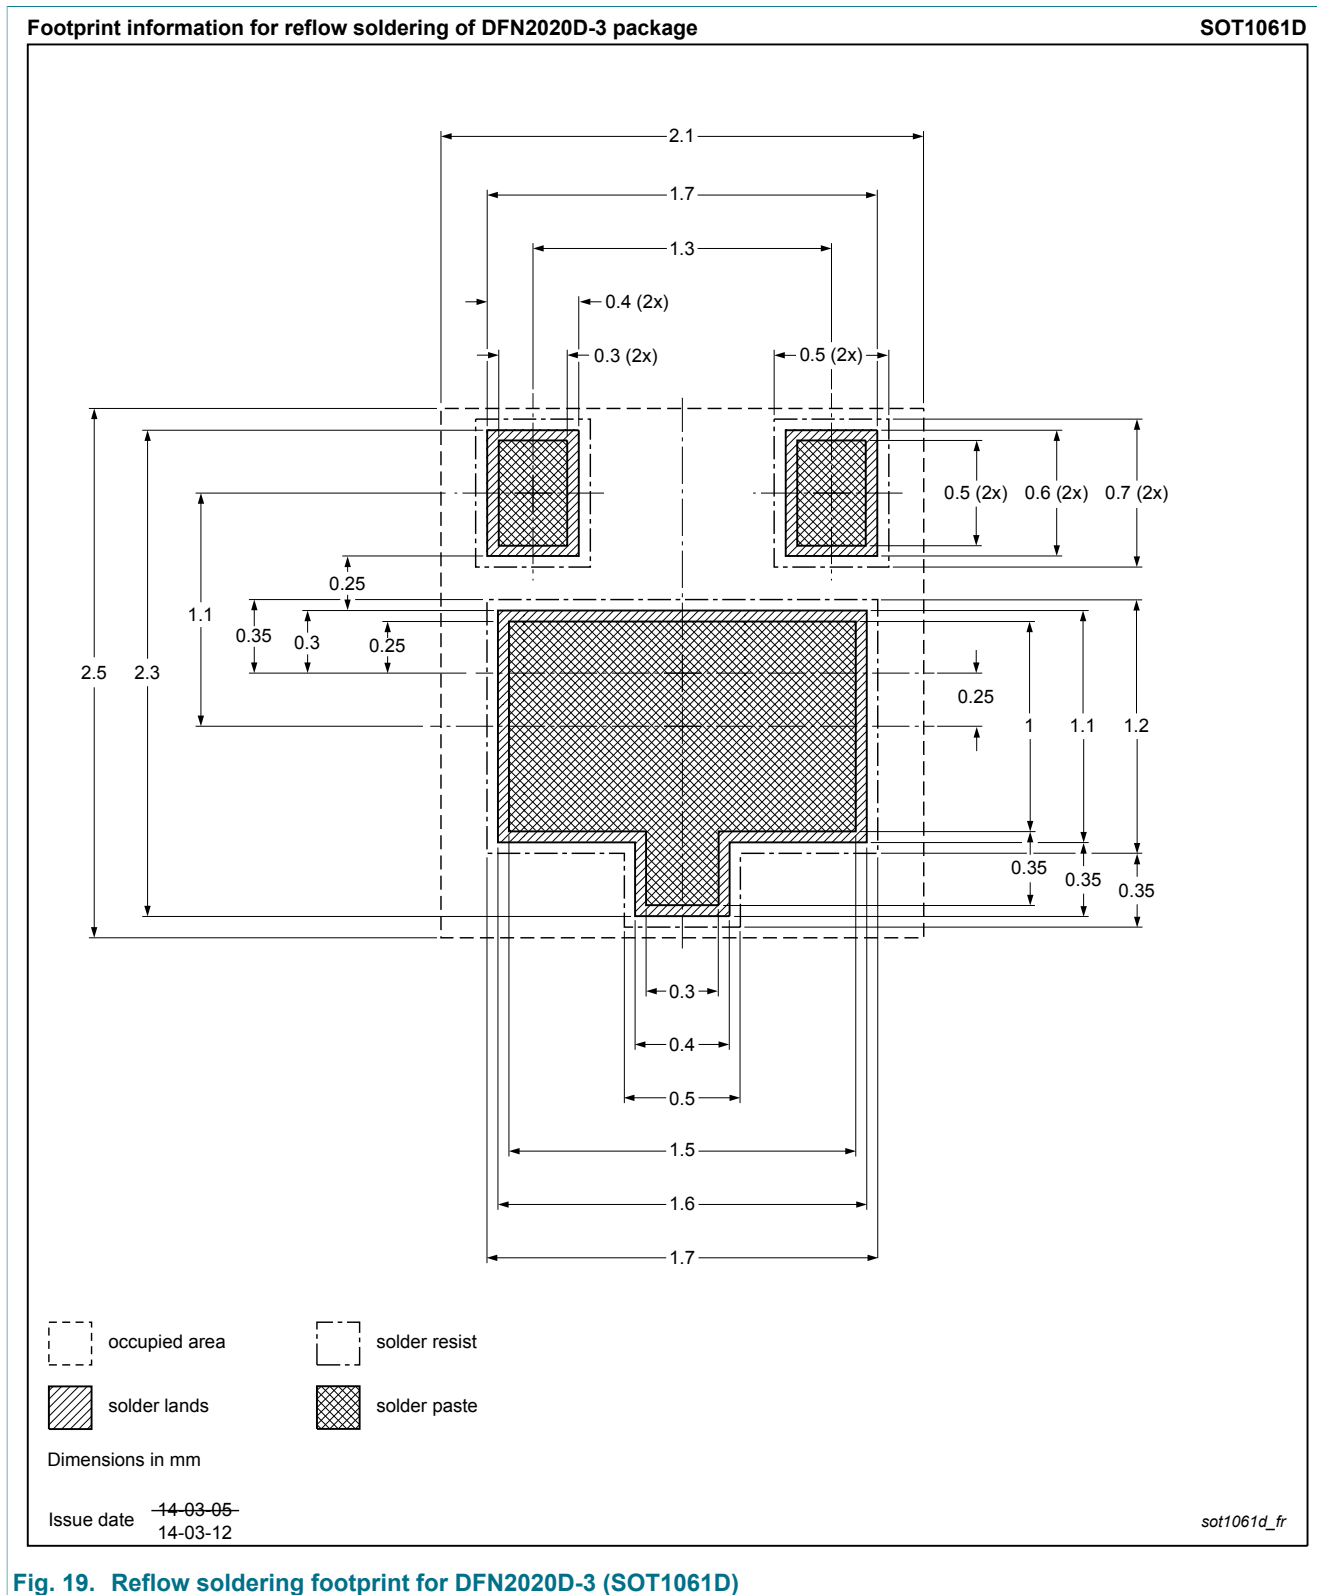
Reflow soldering footprint for DFN2020D-3 (SOT1061D)
